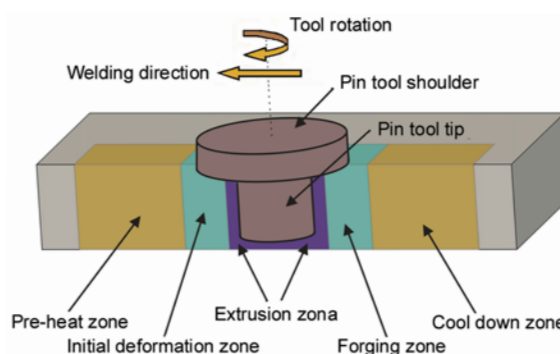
Scheme of the principle of friction stir welding for metals
